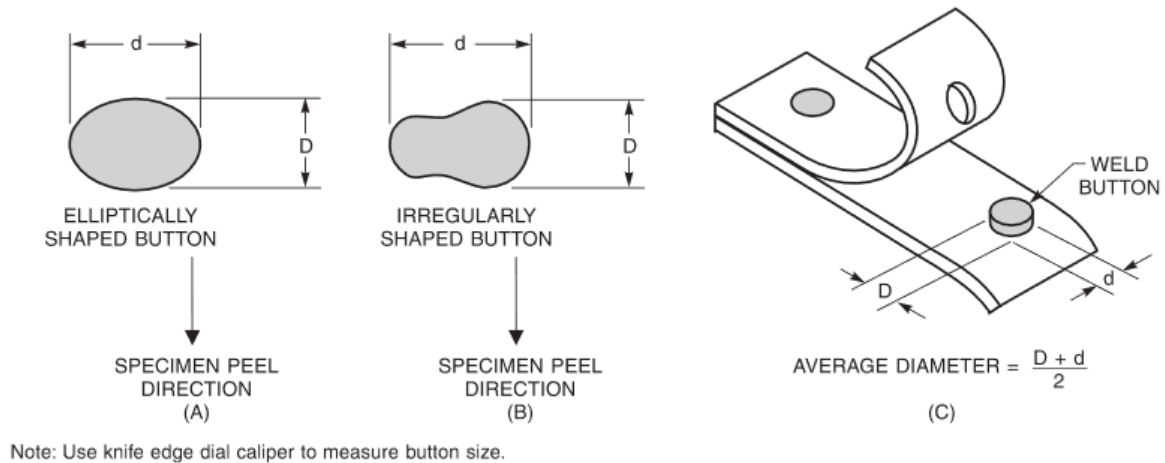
Measurement of a weld button (a) Elliptically shaped button, (b) Irregularly shaped button, and (c) Average diameter calculation [99].
